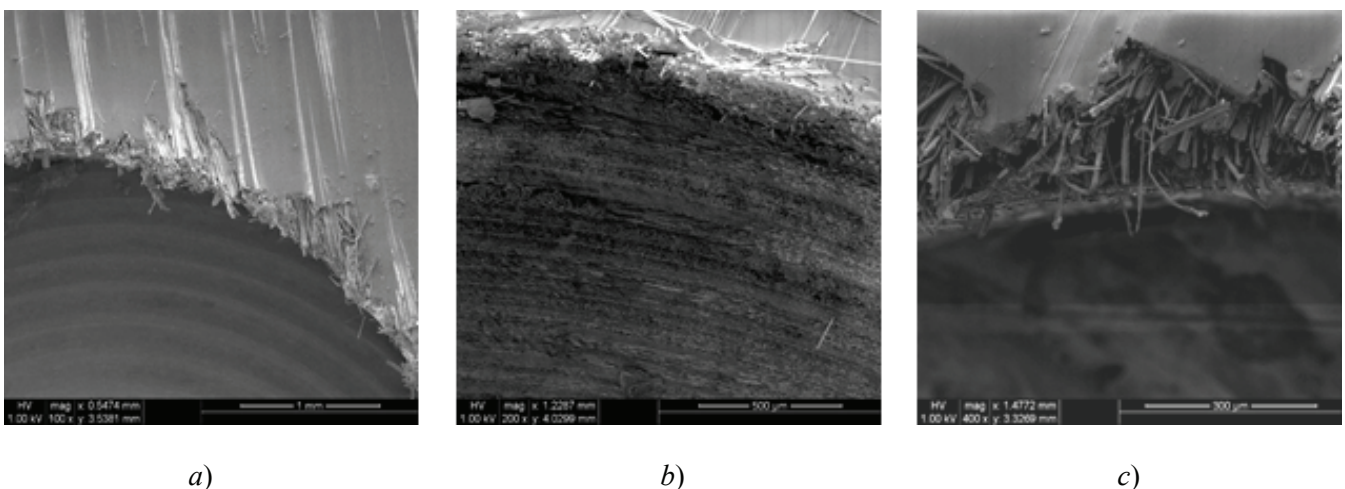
Defects on the edges of parts made of polymer composite materials arising during machining – milling (a, b) and drilling (c)
